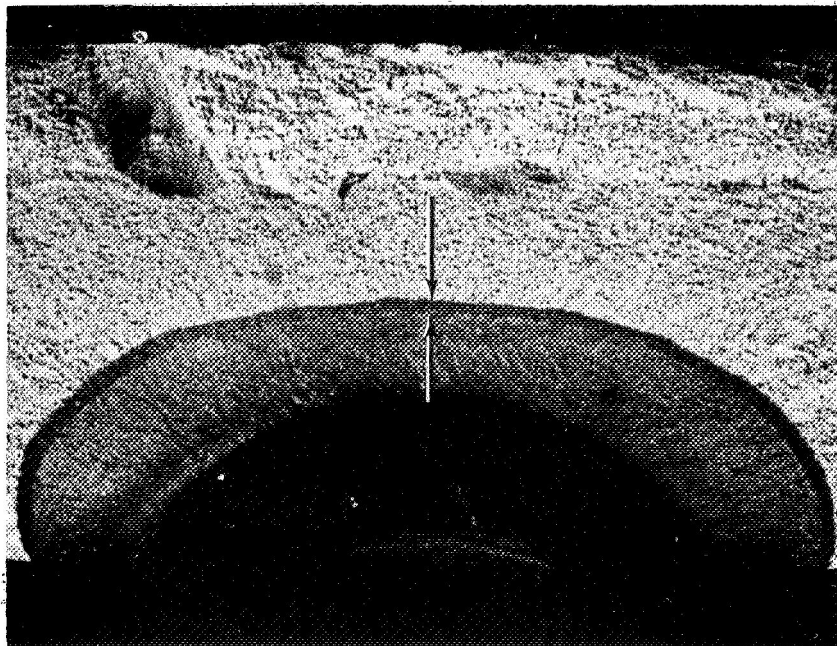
Fracture Face of Al 2021-T81 Surface-Flawed Specimen Showing Slow Crack Extension after Monotonic Loading
